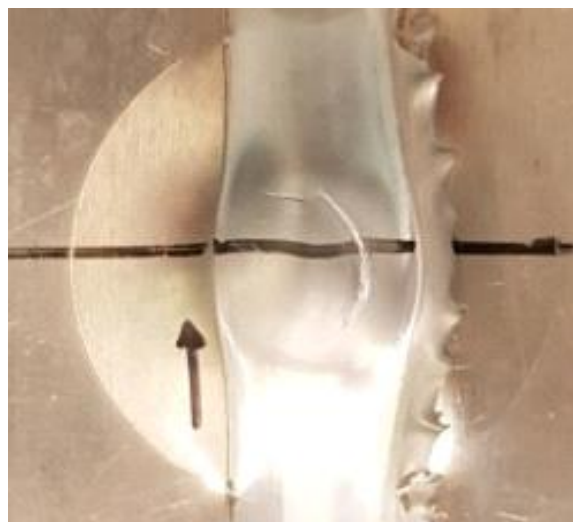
Fractured specimen of y-axis tilting angle 1° after erichsen cupping test
